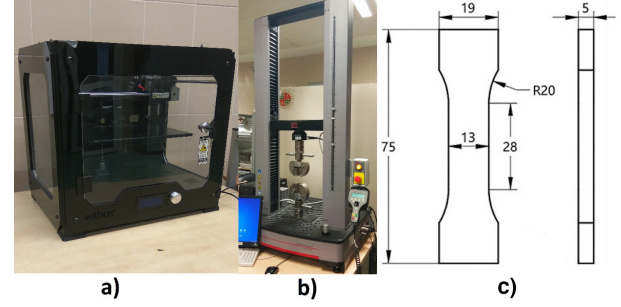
Equipment used in the study: a) 3D printer, b) Universal testing machine and c) mechanical sample.
